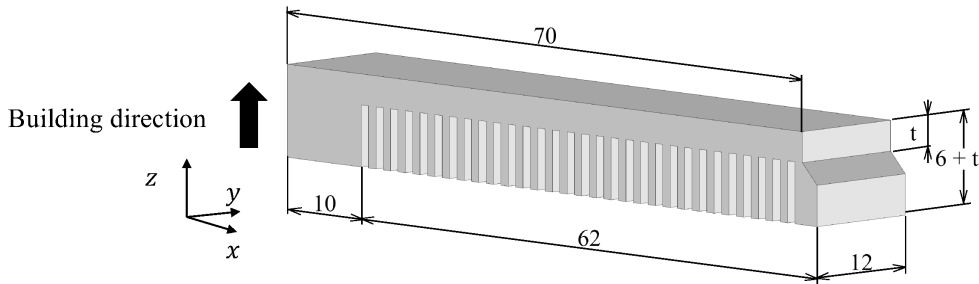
Cantilever specimen with the dimensions in mm.
